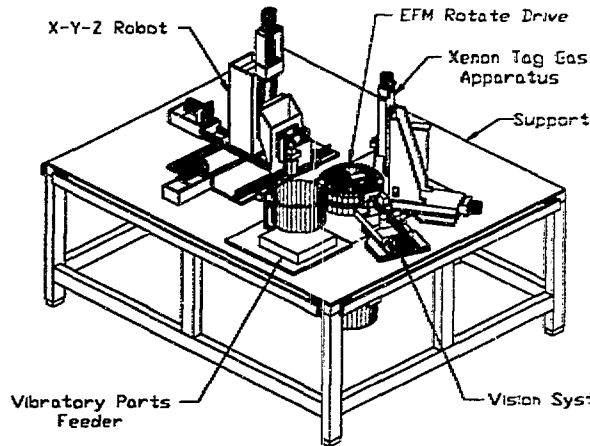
3-D View of the Automated Fuel Element Closure Welding System
